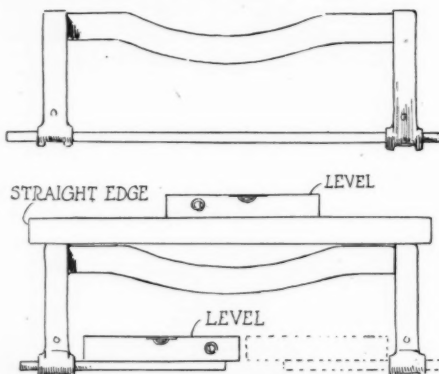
After straightening, the frame horns can be lined up with rods and spirit levels
